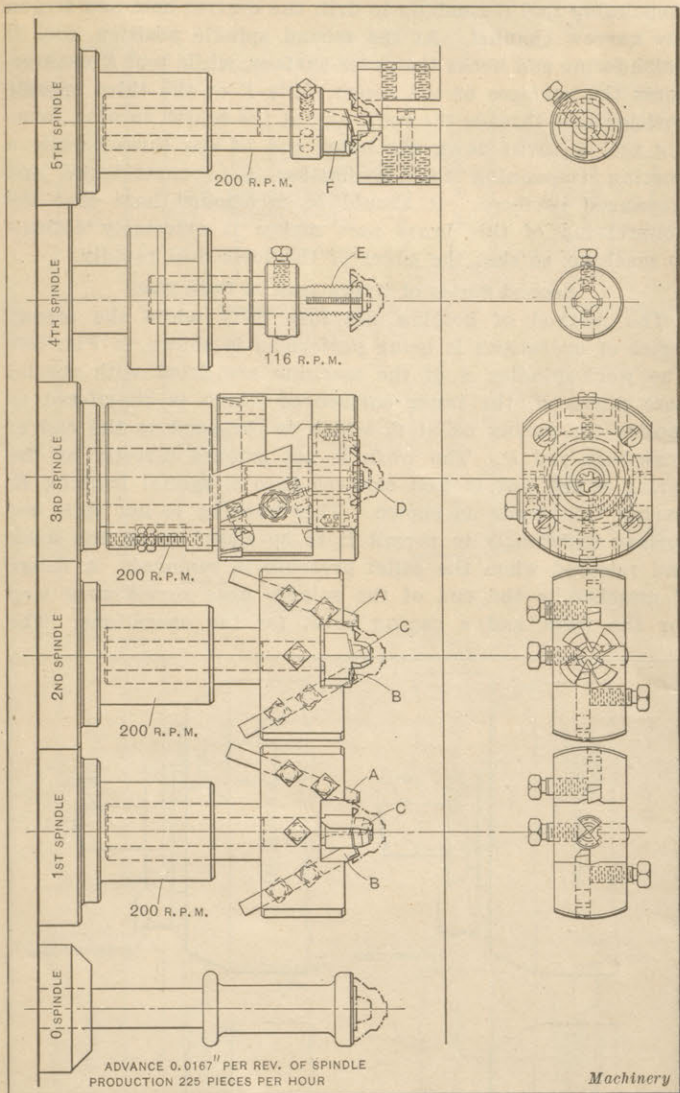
Diagram showing Tooling Set-up for machining Fuse Nose on New Britain Automatic Chucking Machine
